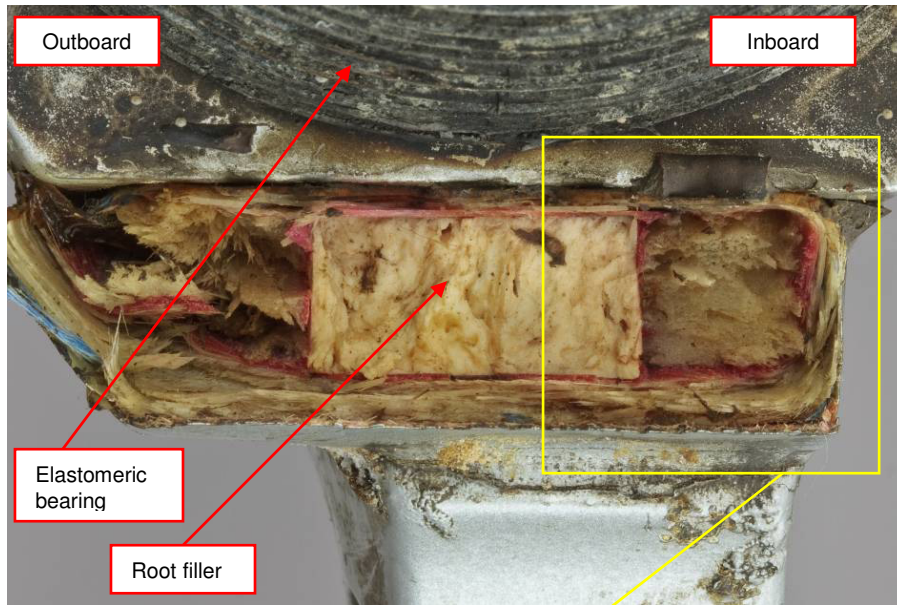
Photographs showing the trailing edge fracture surfaces of the White blade prior to the removal of the elastomeric bearing, the insert photograph shows detail of the bottom (inboard) strap illustrating a reduced number of plies in the GFRC torsion box at the inner surface of the root.
